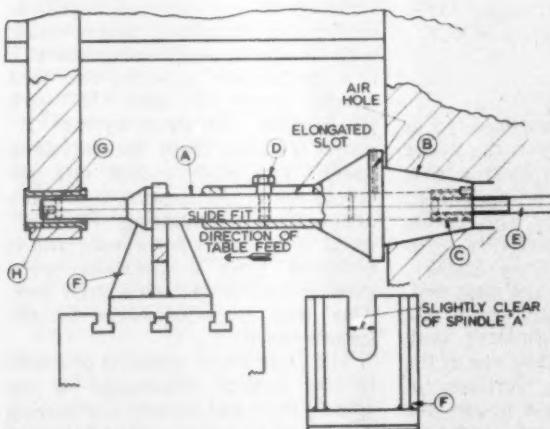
Accurate alignment of the steady bearing with the mandrel taper is secured with this type of set-up
